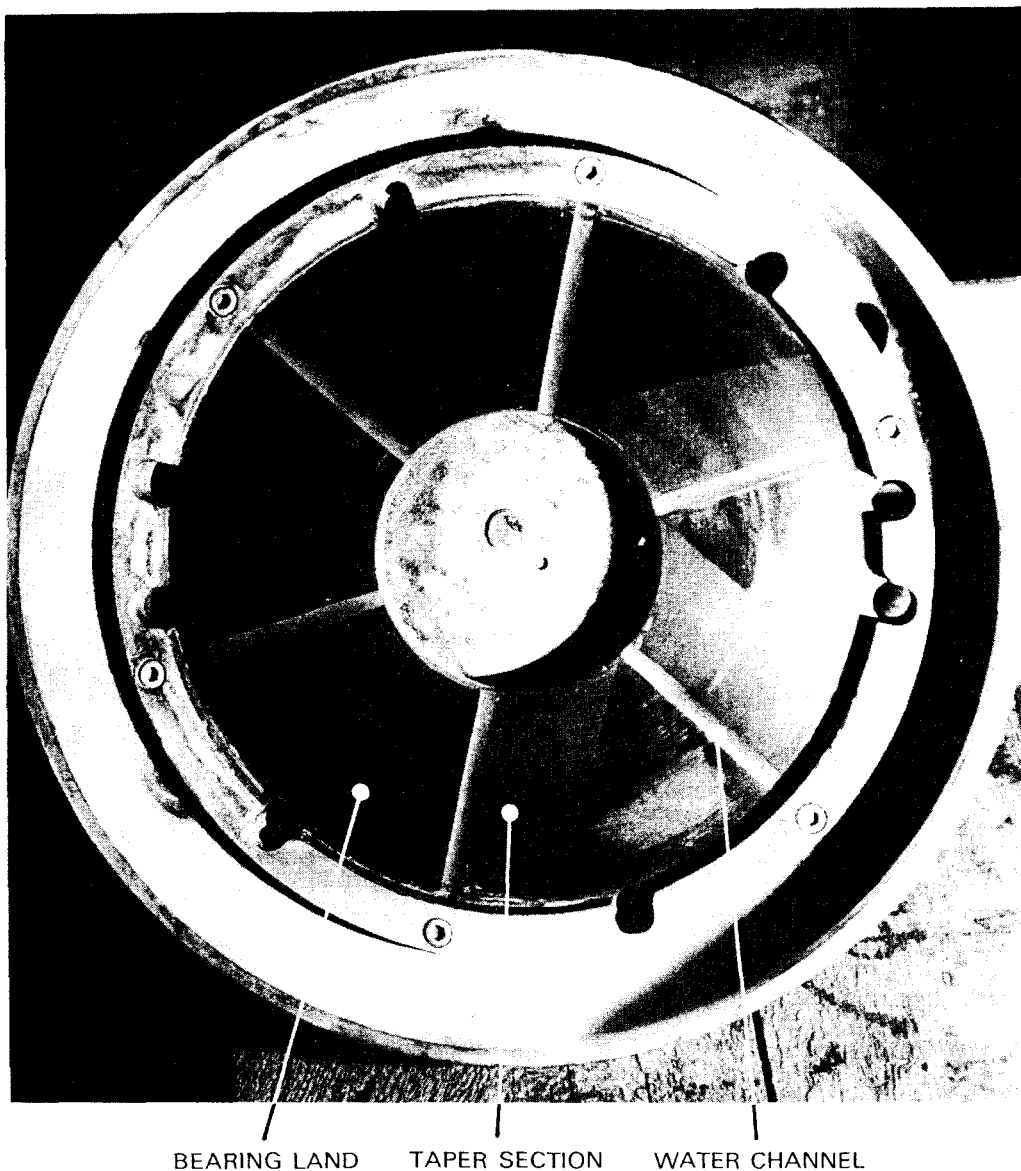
A COATED TAPER-LAND THRUST DISC SECURED IN THE THRUST BEARING HOUSING
